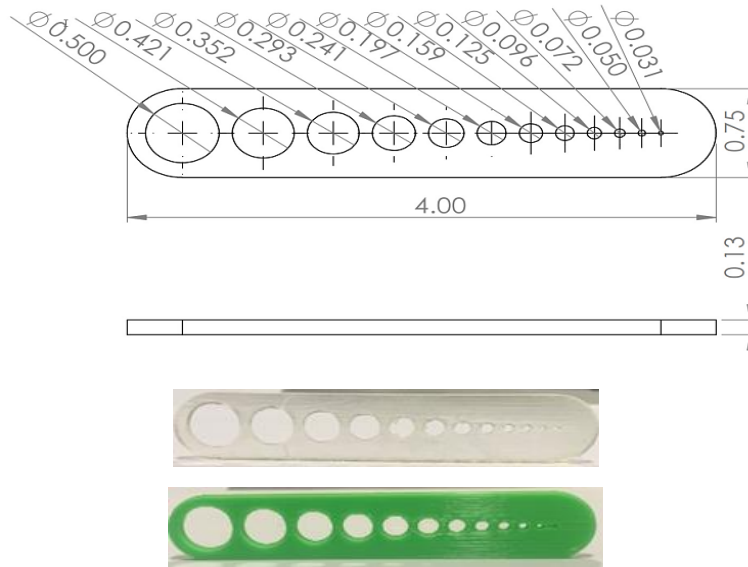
Hole printing test part and the test parts printed in a horizontal orientation via vat polymerization and material extrusion (green part)
